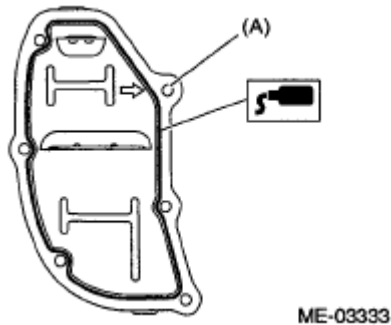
Identifying Oil Separator Cover And Threaded Portion Of Bolt (A)
